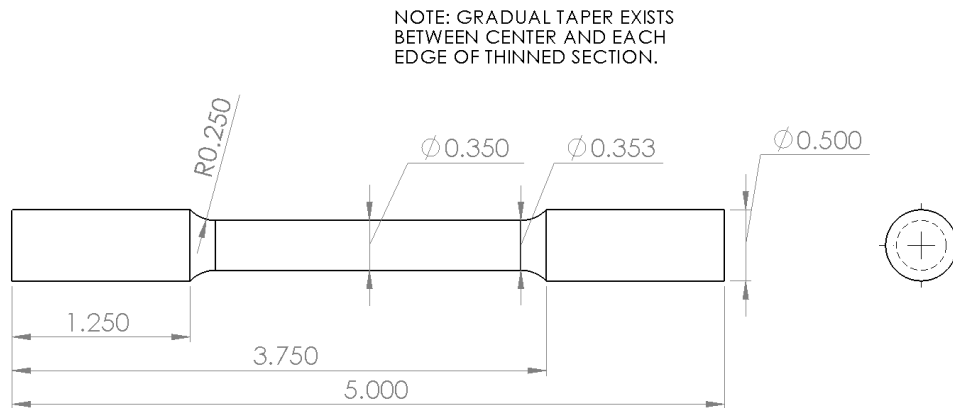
Drawing of round tensile test specimens fabricated using a CNC lathe. A gradual taper is enforced on the narrow section such that either end has a diameter of 0.353" in order to control the location of necking/fracture.
